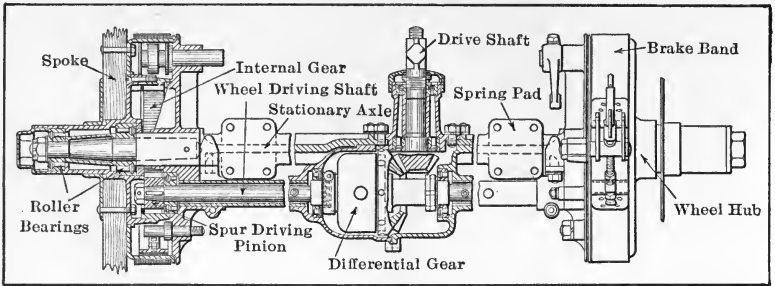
Sectional View of Torbensen Axle for Motor Trucks which Combines Features of Both “Live” and “Dead” Rear Axle Forms and which Utilizes Two Driving Gearing Sets.
